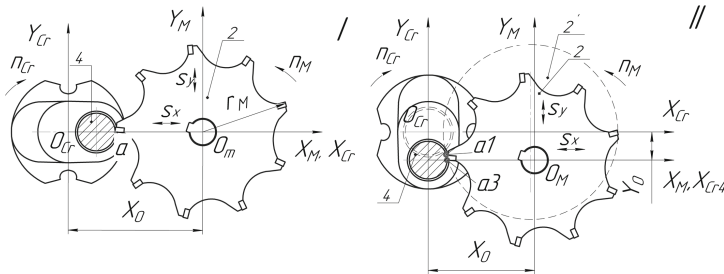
The scheme of milling of connecting rod necks of a cranked shaft.
